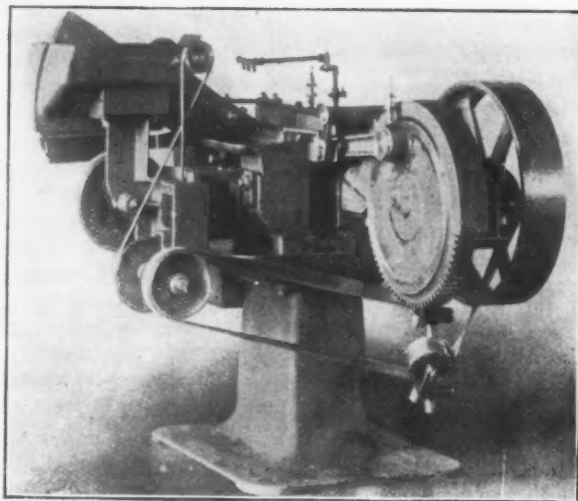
Another View of a Hopper Feed Thread Roller, Showing the Drive of the Hopper.
